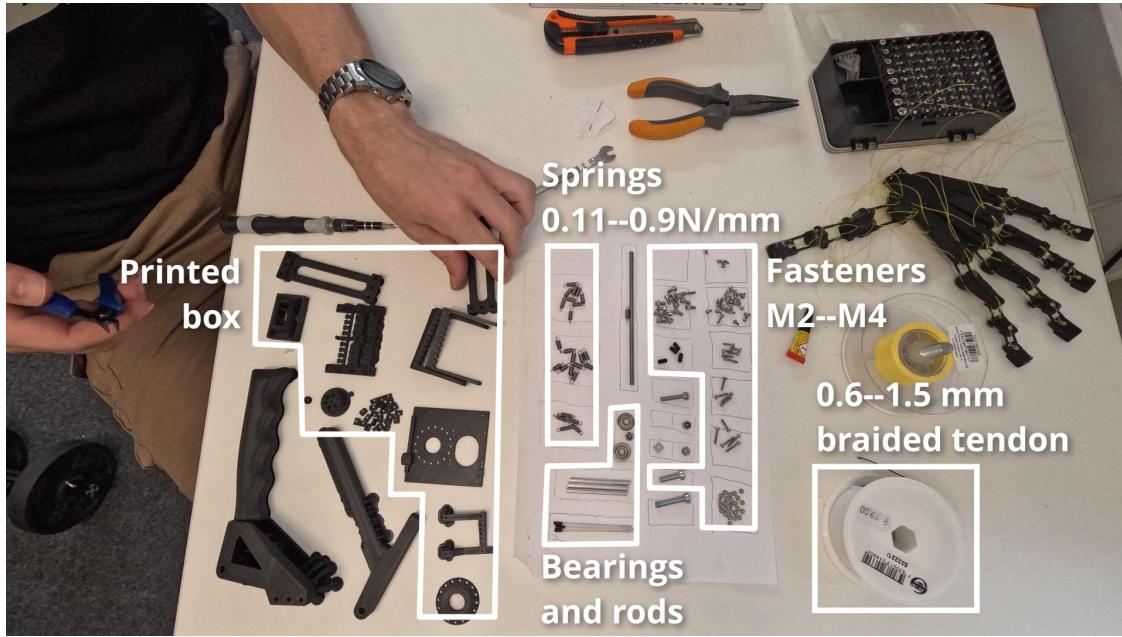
Actuation box assembly needs one set of printed parts, a variety of extension springs, smooth rod, screws and stronger tendon.
